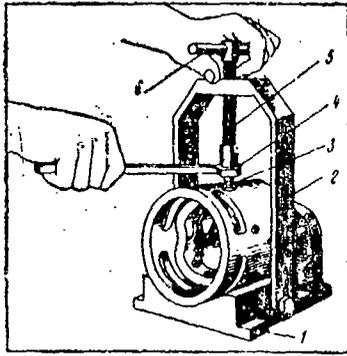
Device for Removal of Generator and Starter Pole Cores:
